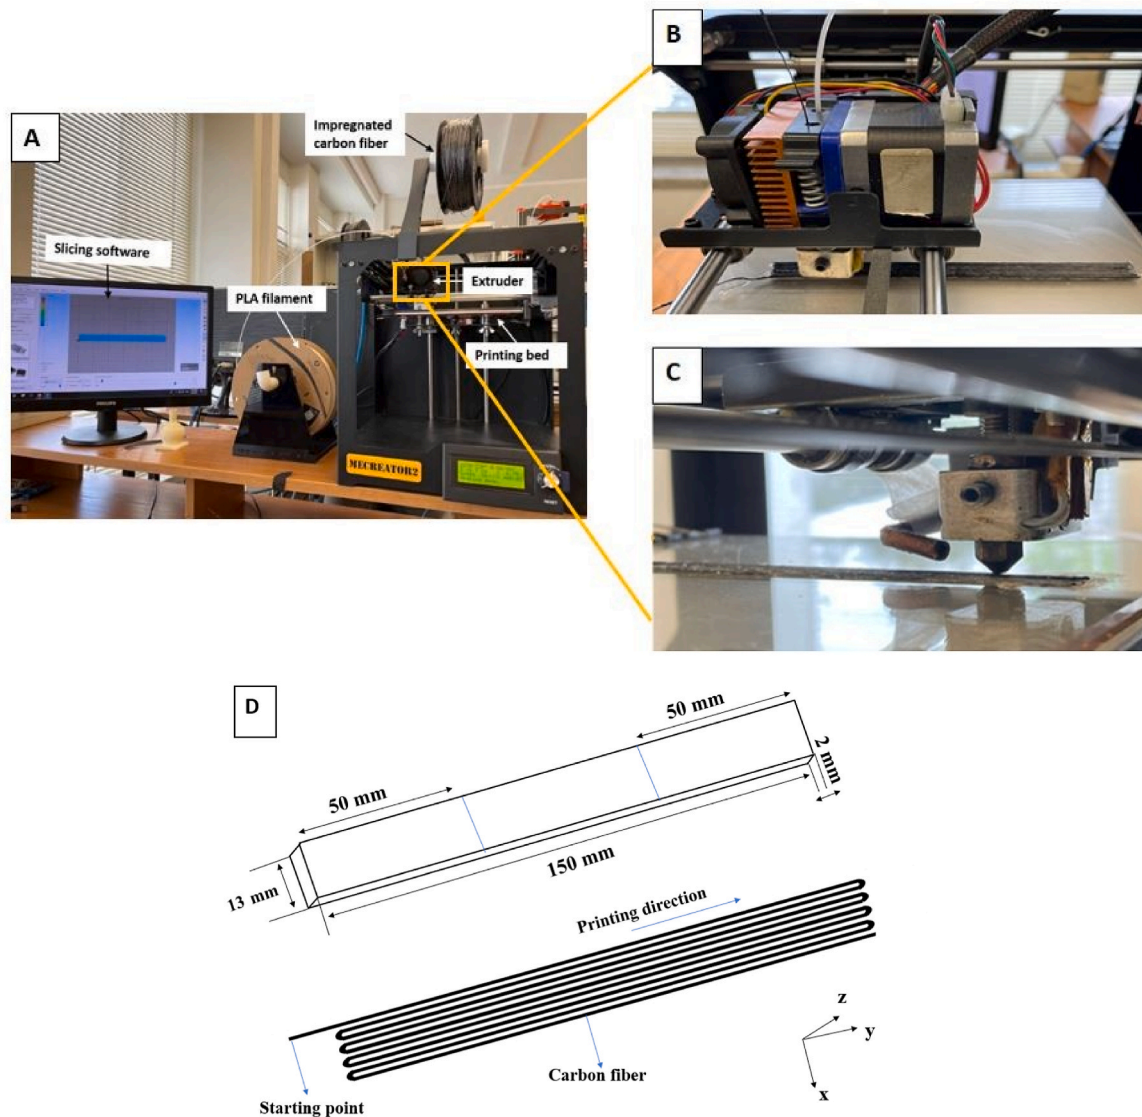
3D-printing setup of the modified FDM printer and filament spools (A); extruder (B); printing nozzle (C); 3D-printed specimen configuration (D).
